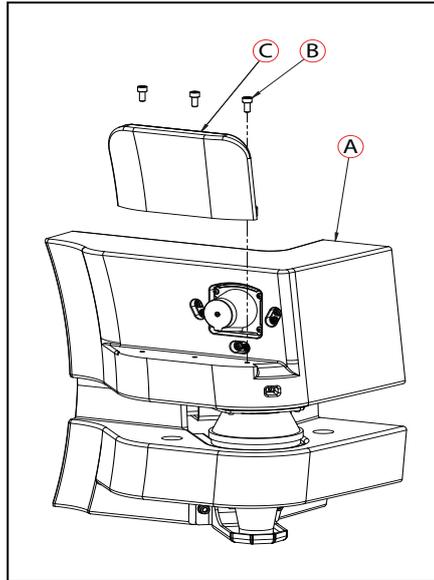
(A) Laser Corner, (B) M6 Screw, and (C) Laser Cover Fin
